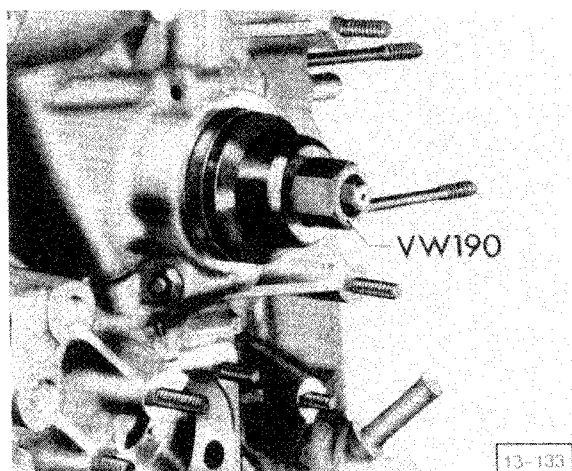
Crankshaft oil seal, cooling fan side, installing
